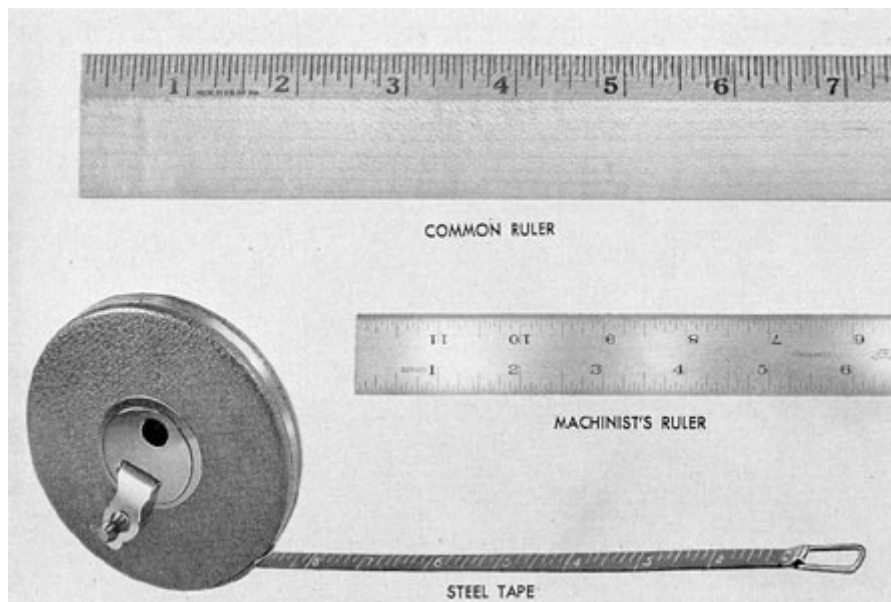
Common ruler, machinist's ruler, and steel tape.
